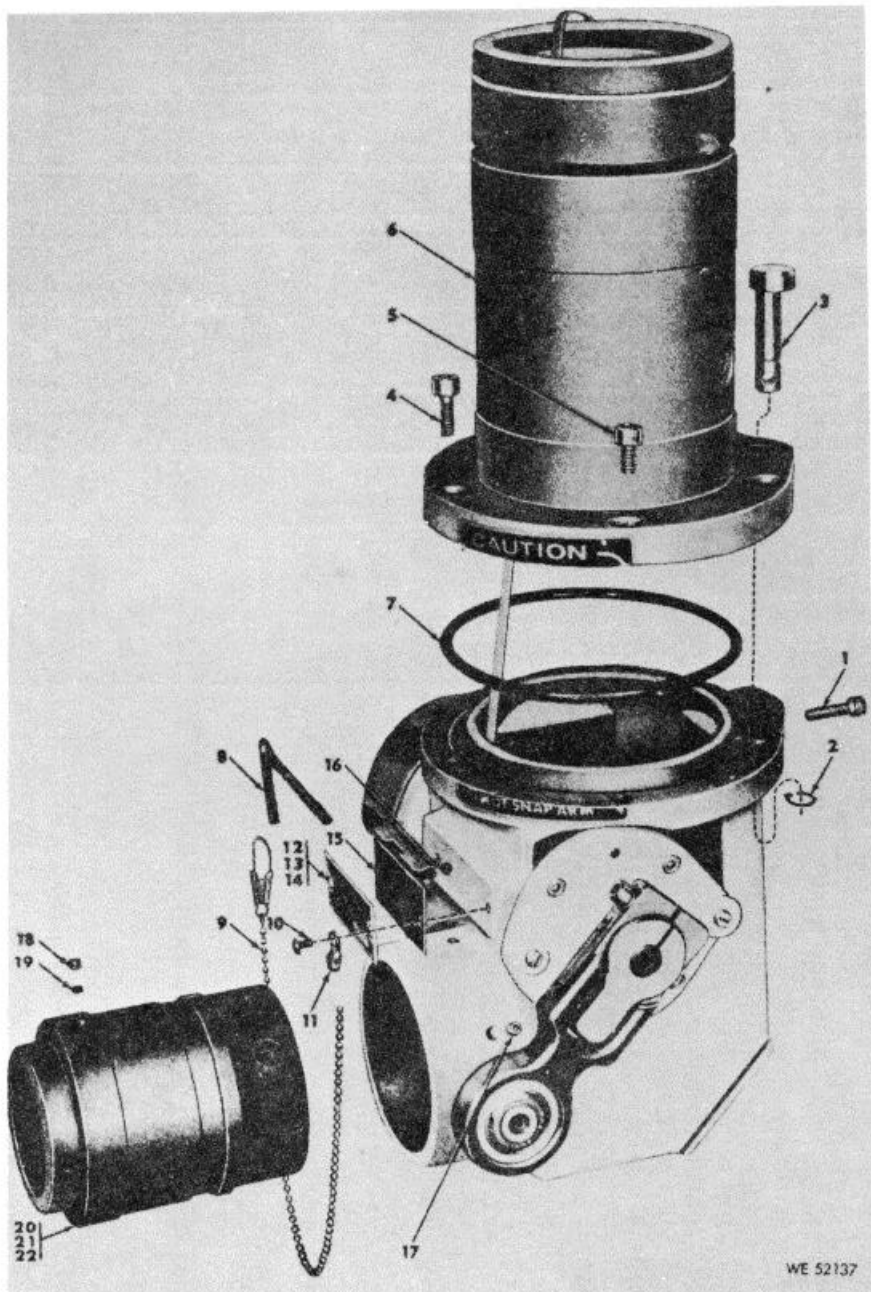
Sight, periscope, M28 (8270601), M28C (8295452), or M28D (8565458) -partial exploded view.
